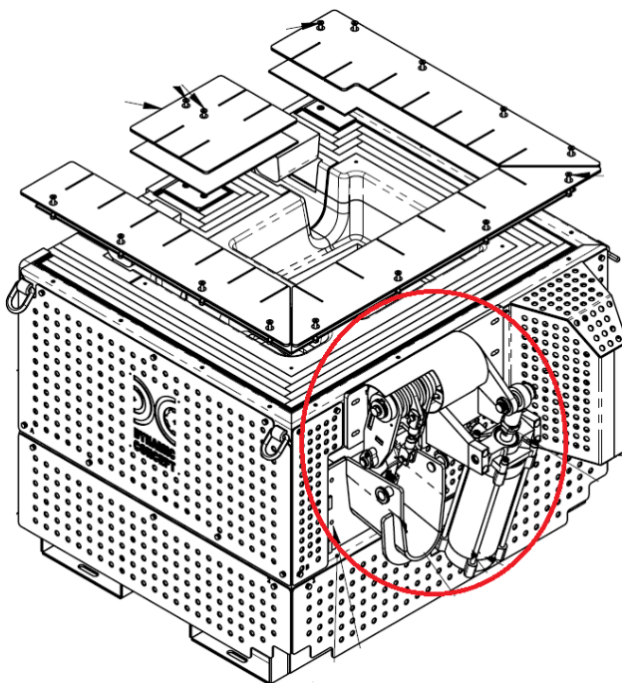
View showing the draining pin mechanism and the filtering box spout to be removed
